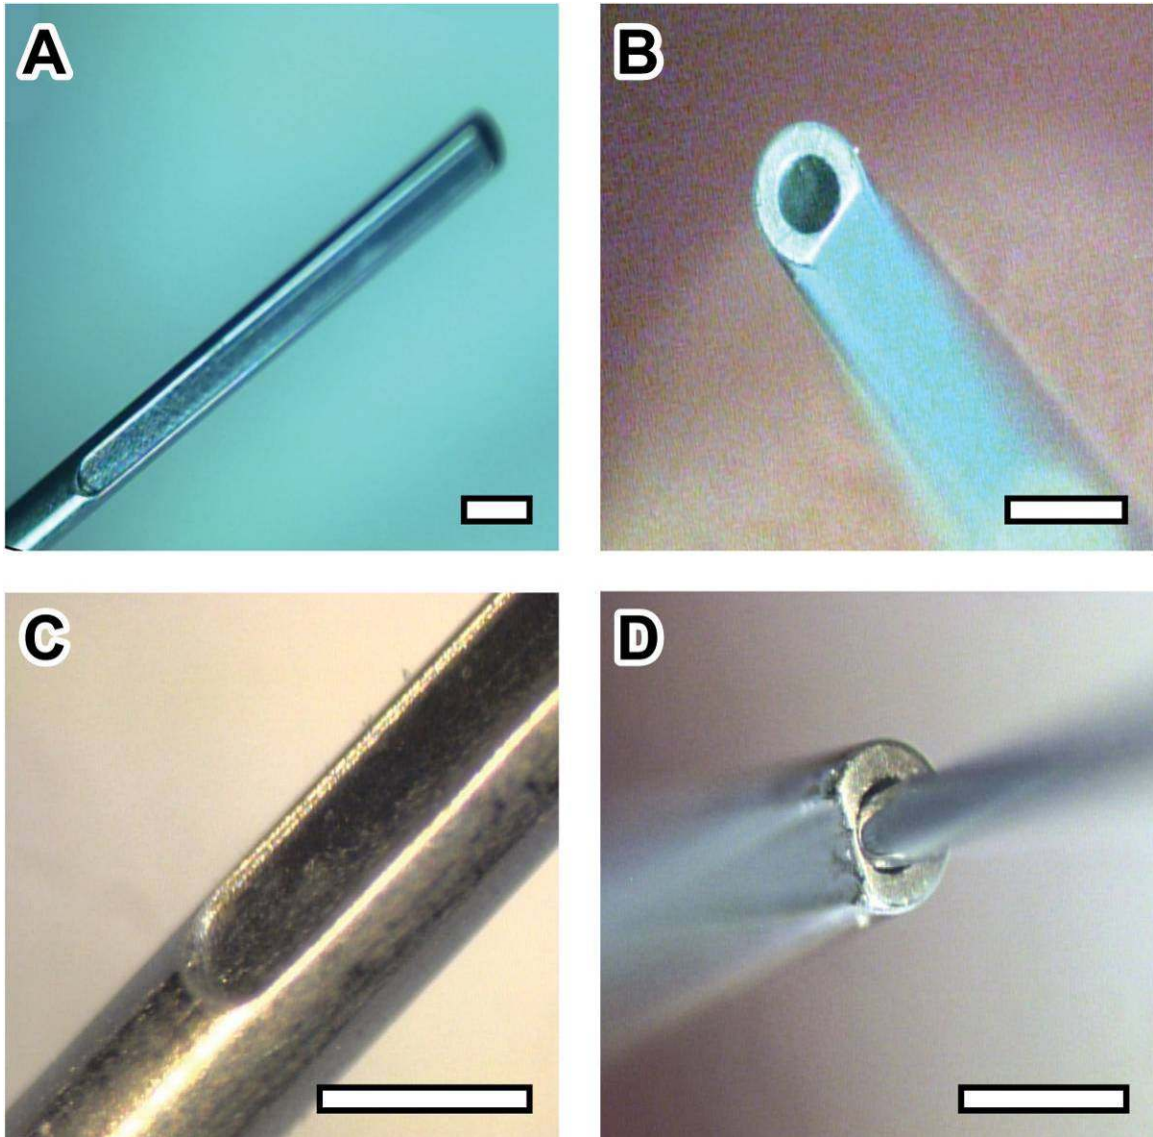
Bright-field photos of the micro-milled notches that were machined onto the end of the stainless steel luer needle (A-D). The needle inner cannula geometry is unaffected by this milling process (B), and a drive cable inserted into the cannula can freely travel (D). All scale bars are 500 μm .
